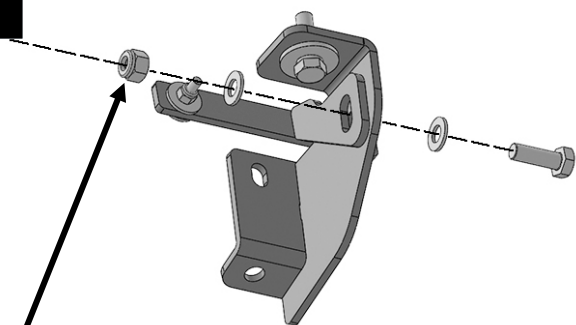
Attach (1) Driver/Left Support Bracket (#1) to the (2) holes in the pinch trim in the front location
